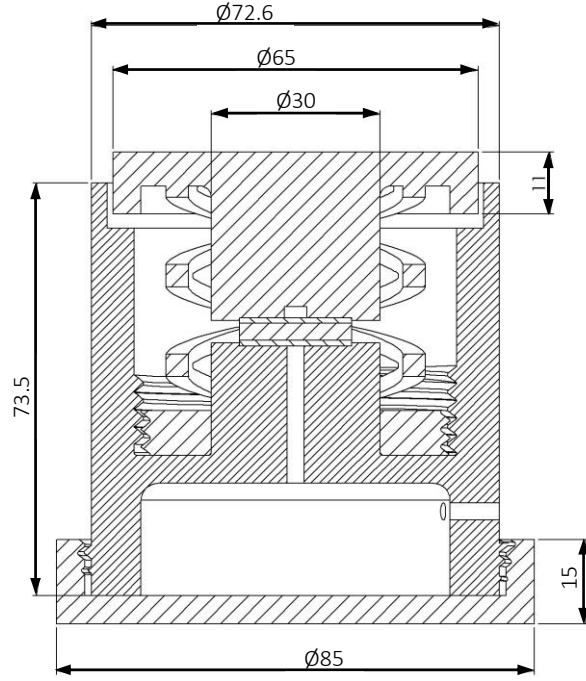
Basic dimensions of the proposed tactile sensor.
